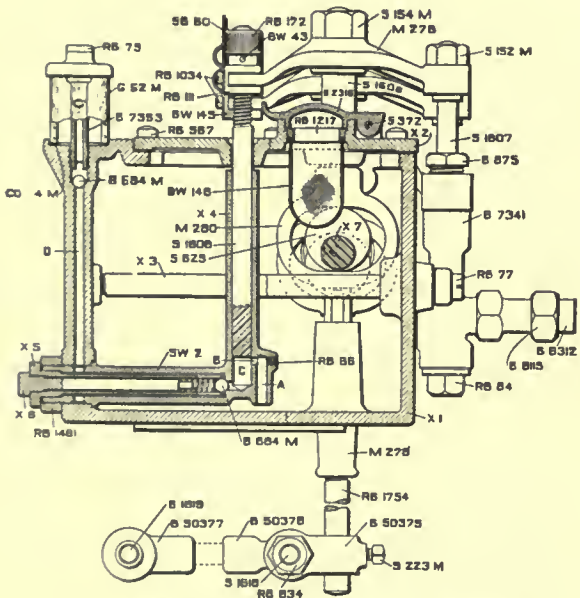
MECHANICAL CYLINDER LUBRICATION. SECTION THROUGH LINE C.C.
